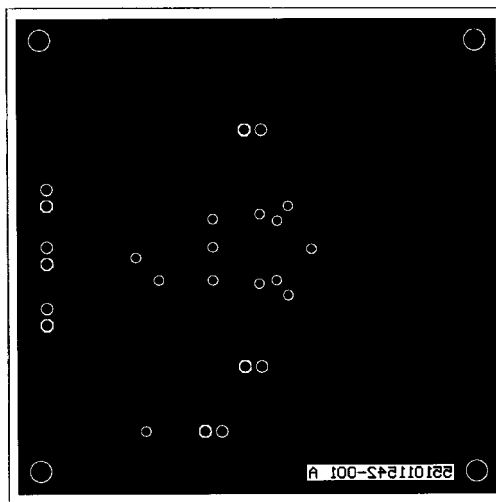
Recommended PWP Board Layout: Bottom-Side Layout
